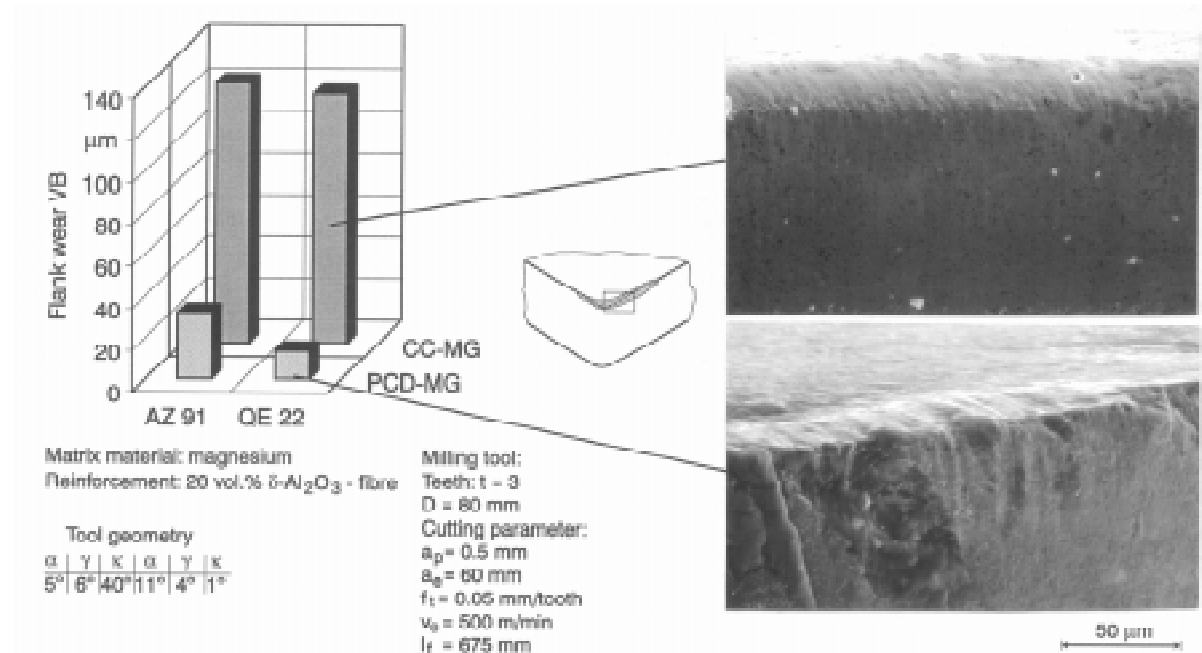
Tool wear when milling reinforced magnesium with cemented carbide and PCD
